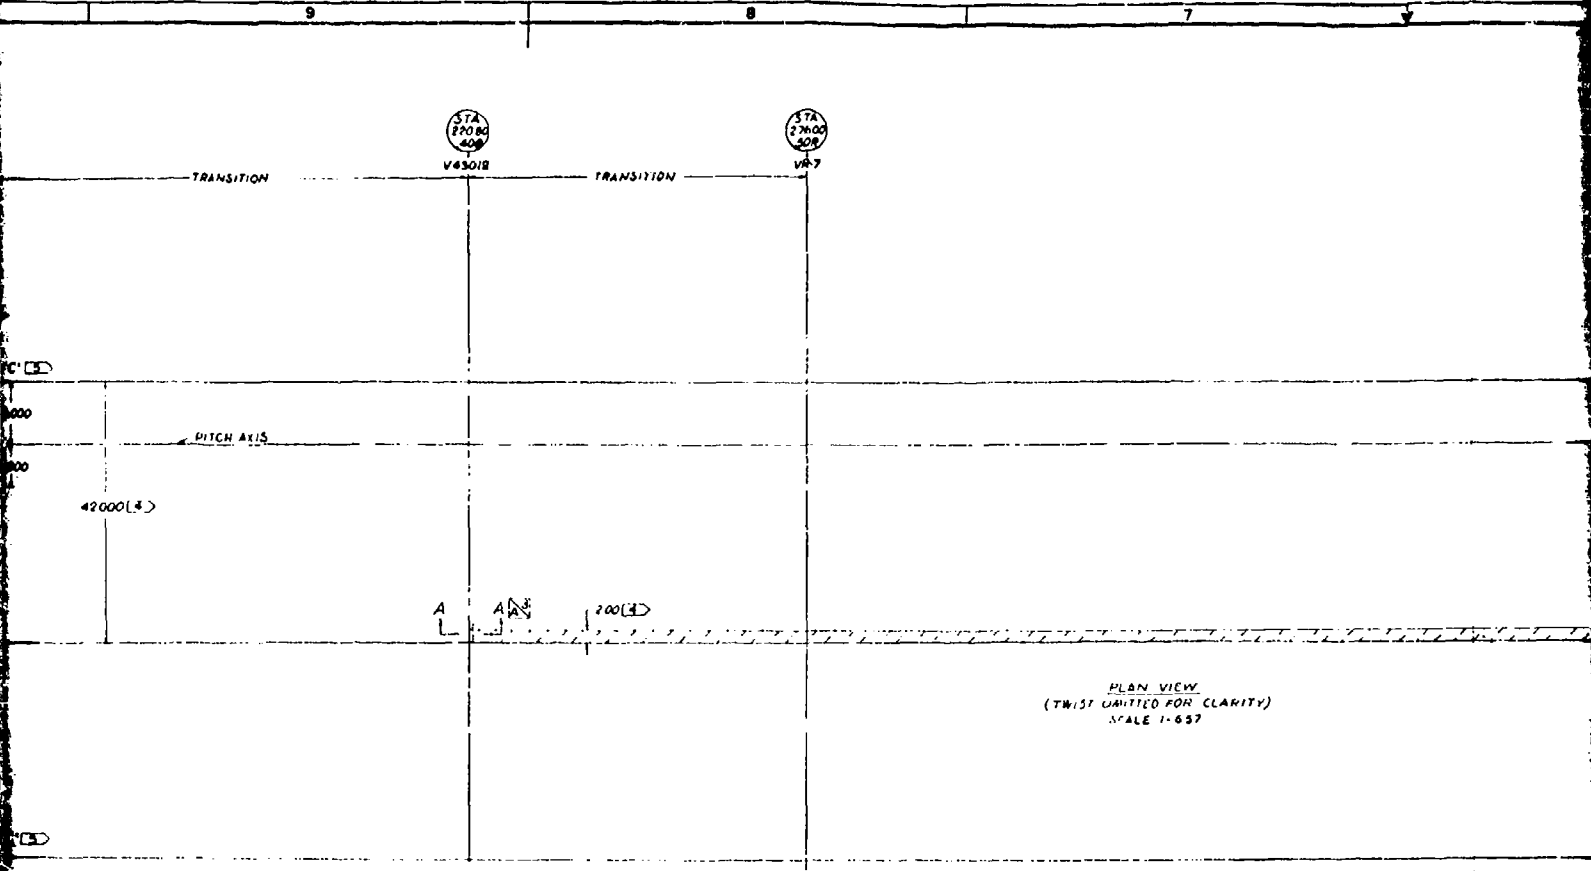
Geometry Two-Pin, Fittingless HLH Rotor Blade
